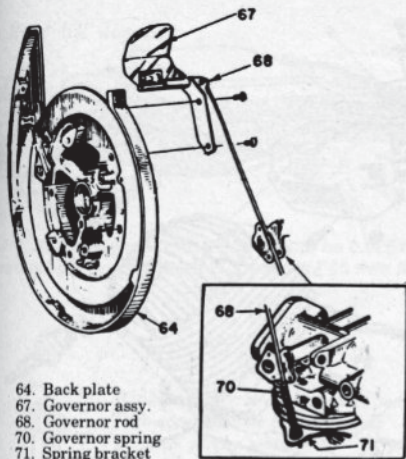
View showing governor hookup used on models Super WIZ 66, Super 77 and Super WIZ 80. Refer to Fig. HL215; throttle rod is connected at hole numbered (3). Governor spring (70) is compressed between bracket (71) and shoulder on governor rod.
